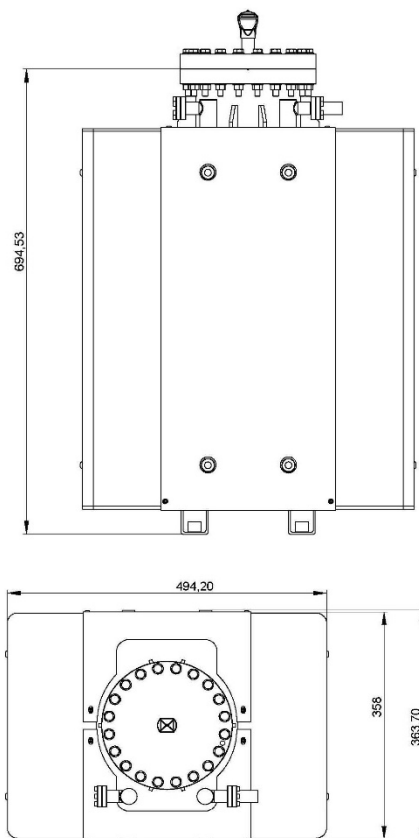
Vaclon Plus 800 CFF 8" outline drawing, showing pump overall dimensions (in mm)
